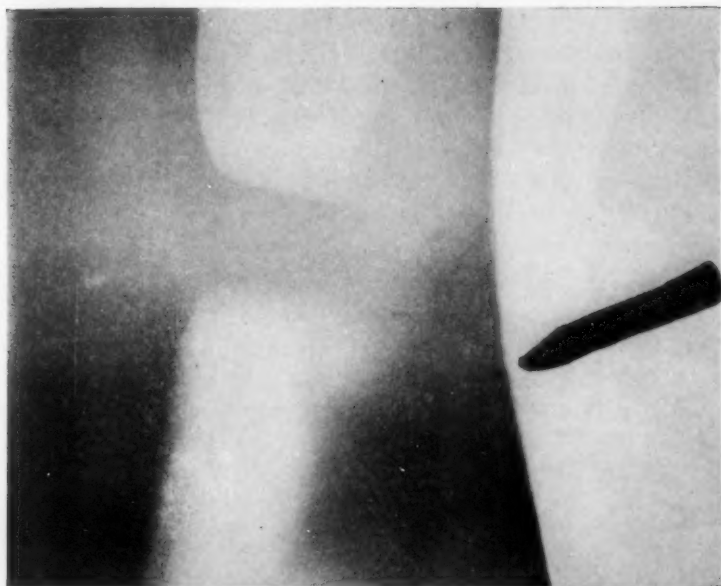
RADIOGRAPH OF WELDED CASTING SHOWN IN FIG. 7.
